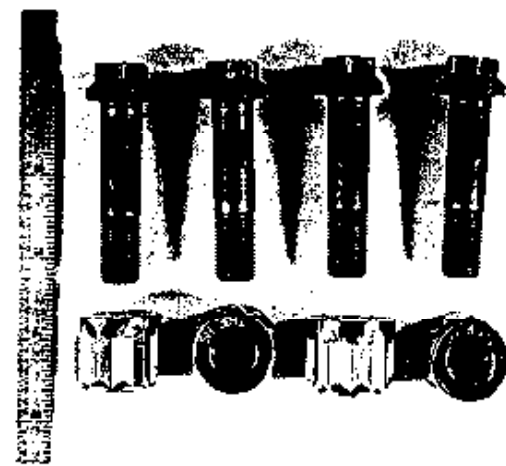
(left).- Test specimens after tensile strength evaluation. All ZipNuts exceeded minimum tensile strength requirements, with 1 bolt fracture, and 3 nuts stripped threads.
